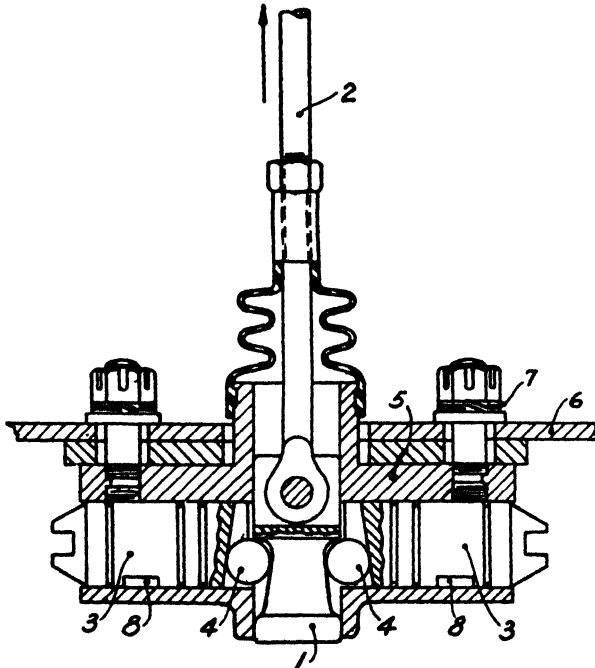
GIRLING WEDGE-TYPE ACTUATING MECHANISM.
